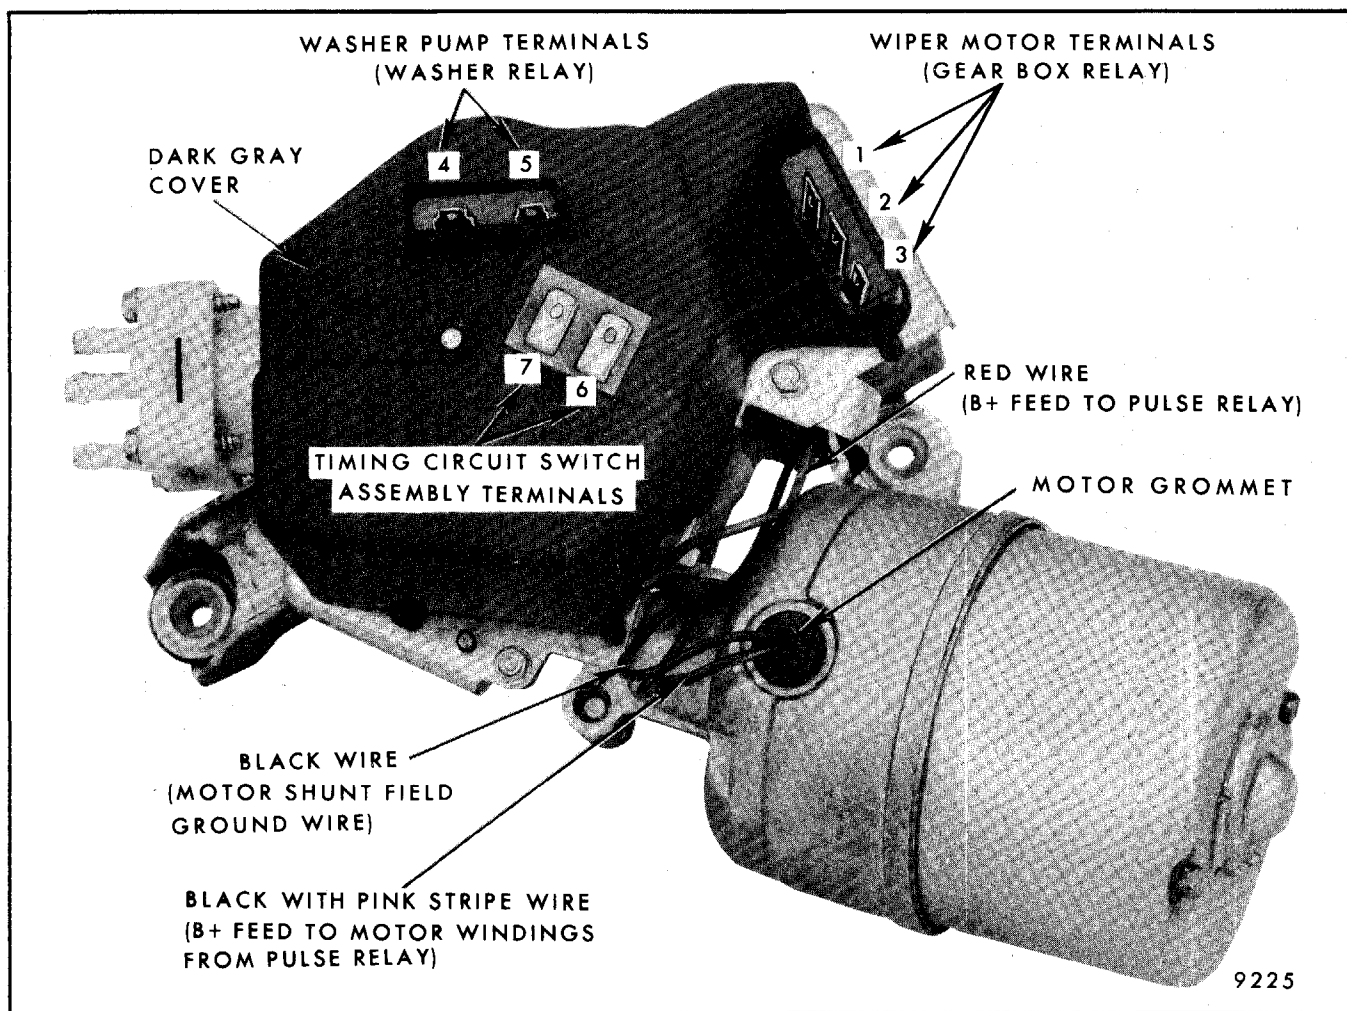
Modified Pulse Wiper Motor and Pump Assembly
